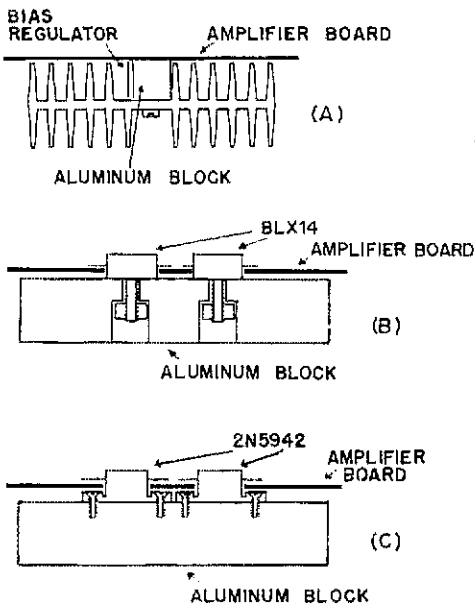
Details of the heat sink and circuit board mounting for the solid-state amplifier. One cooling fin was removed to make room for the bias regulator, as seen in drawing A. This view also shows the solid aluminum block mounted at the center of the heat sink. The power transistors on the main circuit board, and those on the bias board, are mounted so that heat from them is conducted away through the aluminum block to the main heat sink.
